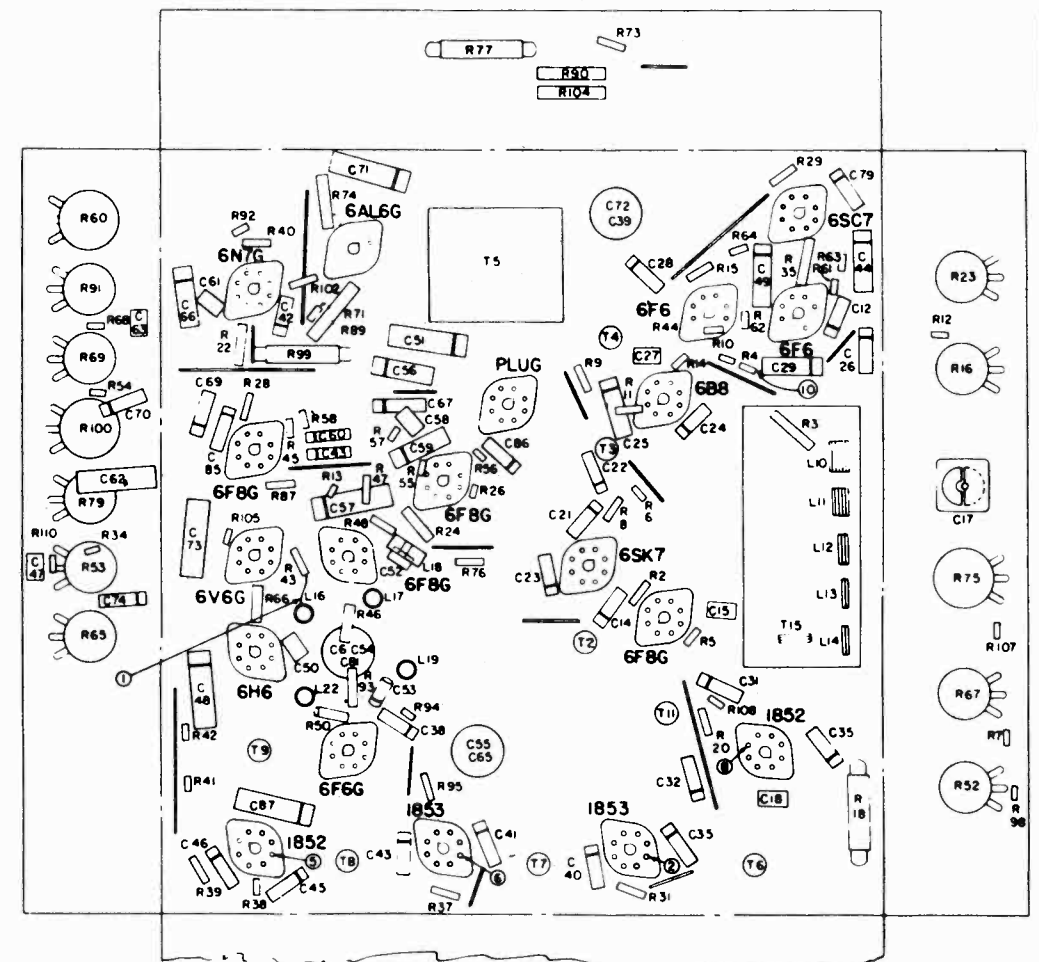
Television Chassis Parts Layout Models HM-225 and HM-226-7A
